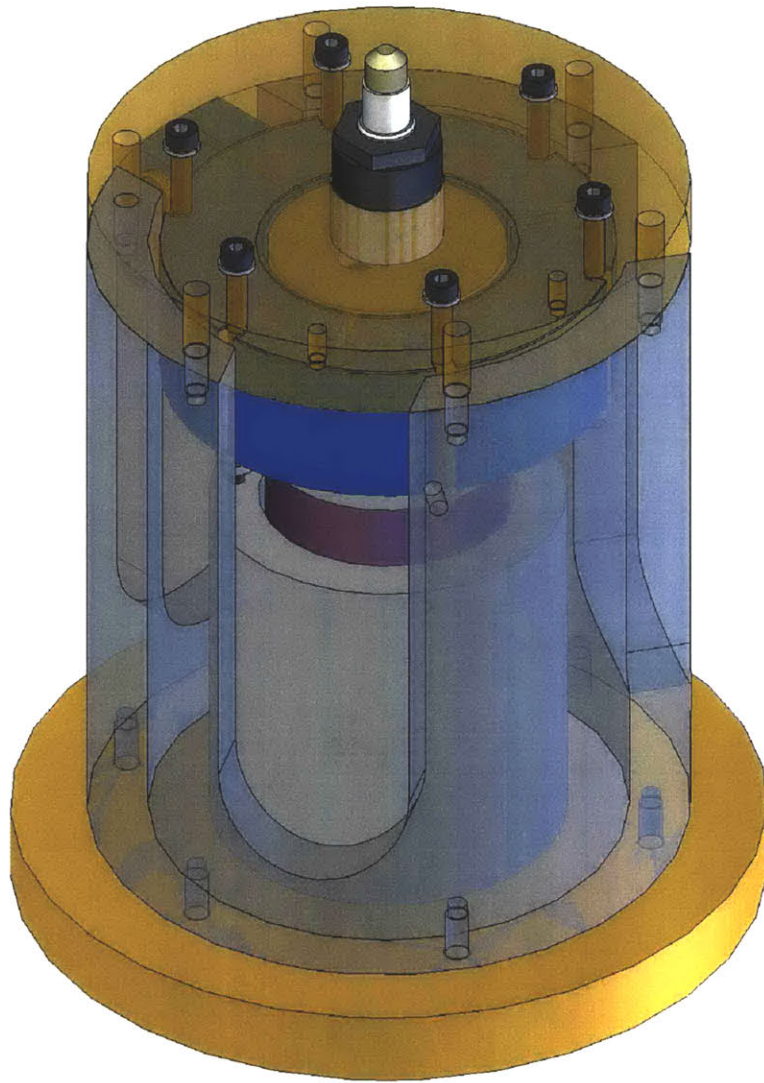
Solid model of shear test device (Some parts shown transparent to clarify assembly).
